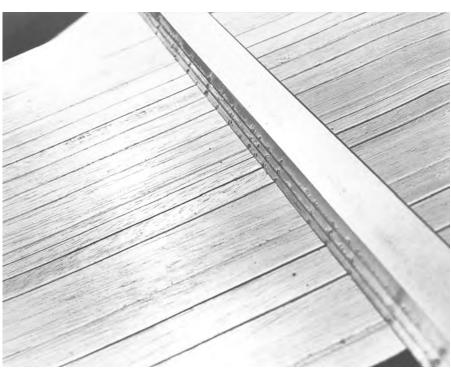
Damaged or nicked knives will leave long ridges on the planed stock. Inspect each board before you plane it to insure there are no staples, tacks, paint, dirt, glue beads, or similar materials that will damage the knives. Never plane plywood, hardboard, or any material other than solid wood.
